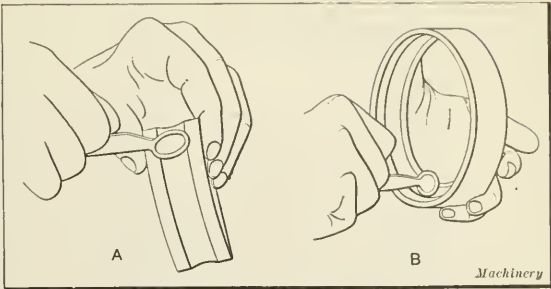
Use of Templet for inspecting Raceways in Outer and Inner Ball Bearing Rings
